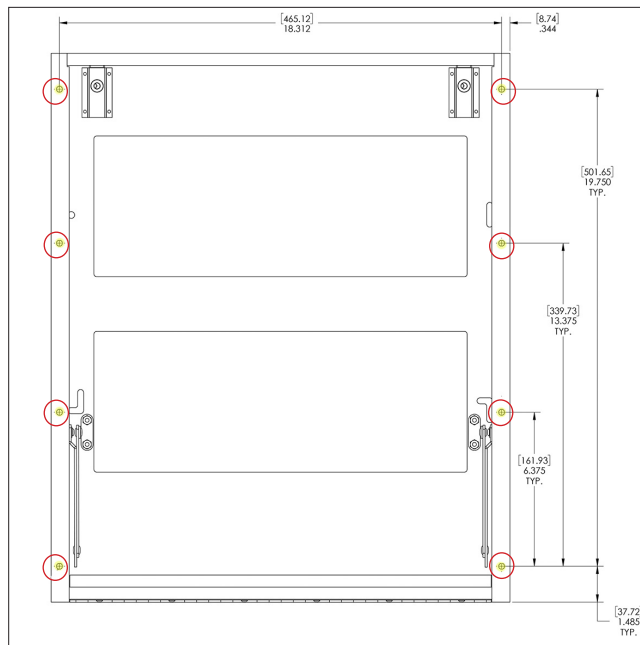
Figure A. Back of VHMF with rack mounting screw holes x 8 highlighted. Image also available in product drawing for p/n 310104368.
